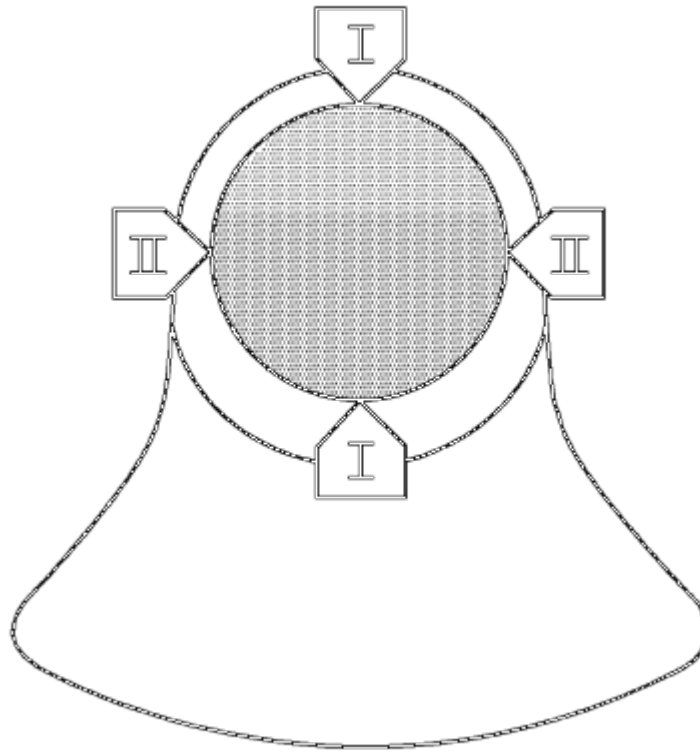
Measuring Crankshaft Bearing Journal Diameter At 2 Points
